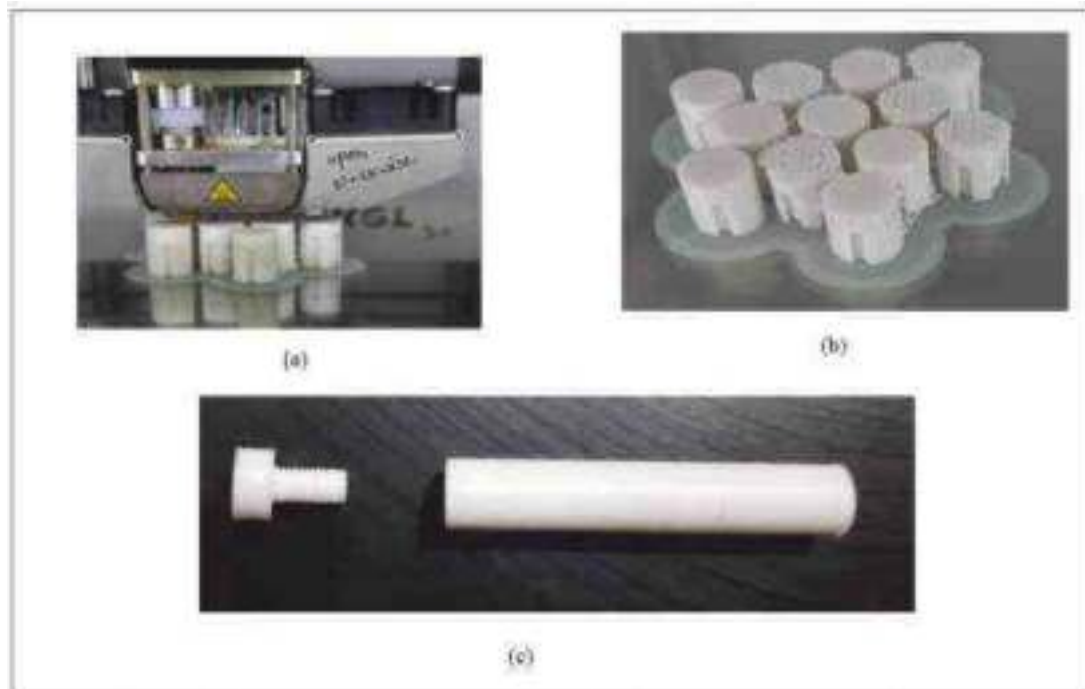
(a) Samples being 3D printed. (b) Printed Samples (intextured and textured); (c) Final Sample Pin
